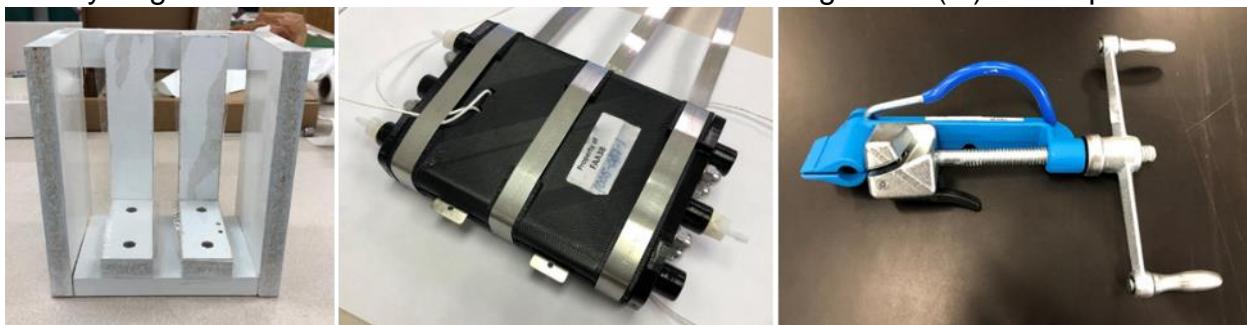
Stack Assembly Fixture, Assembled Single Cell, and Tensioning Tool (R)
